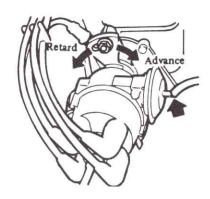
Adjusting ignition timing by turning the distributor in its housing (Sec 8)
